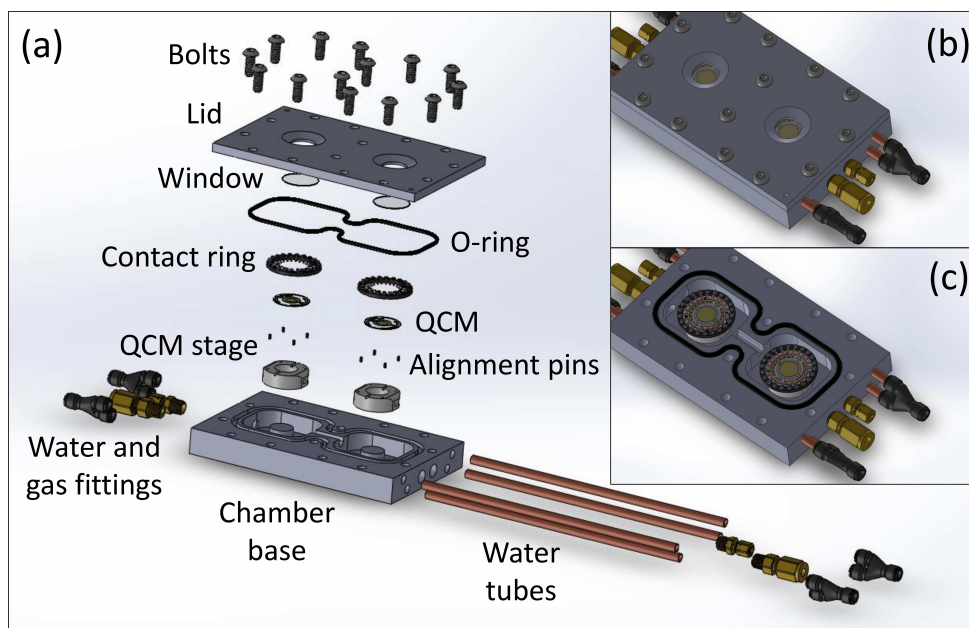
(a) Exploded schematic of the environmental pressure chamber. The QCM samples are centered on a Macor stage with Teflon pins and held in place with a circular spring array. A Buna-N O-Ring provides the gas seal for the chamber. The glass window, serving as the optical port, is affixed to the chamber lid with epoxy, creating a hermetic seal. Gas, fluid, and wire feedthroughs are on the sides of the chamber. (b) Lid on and (c) lid off schematic images of the assembled sample chamber.
